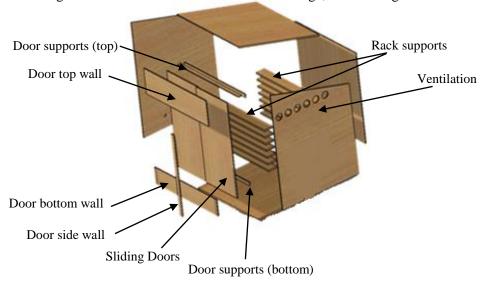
Exploded view of chamber. Parts include: rack supports, drying racks, 3/8" thick plywood walls and sliding doors all made of plywood.
